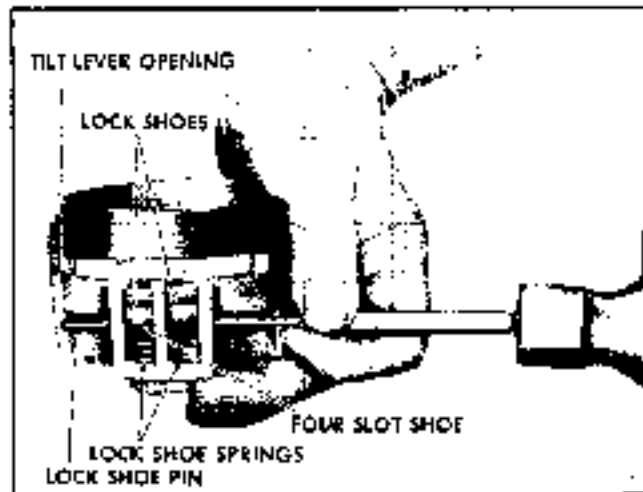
Removing Lock Shoe Pin, Shoes and Springs
